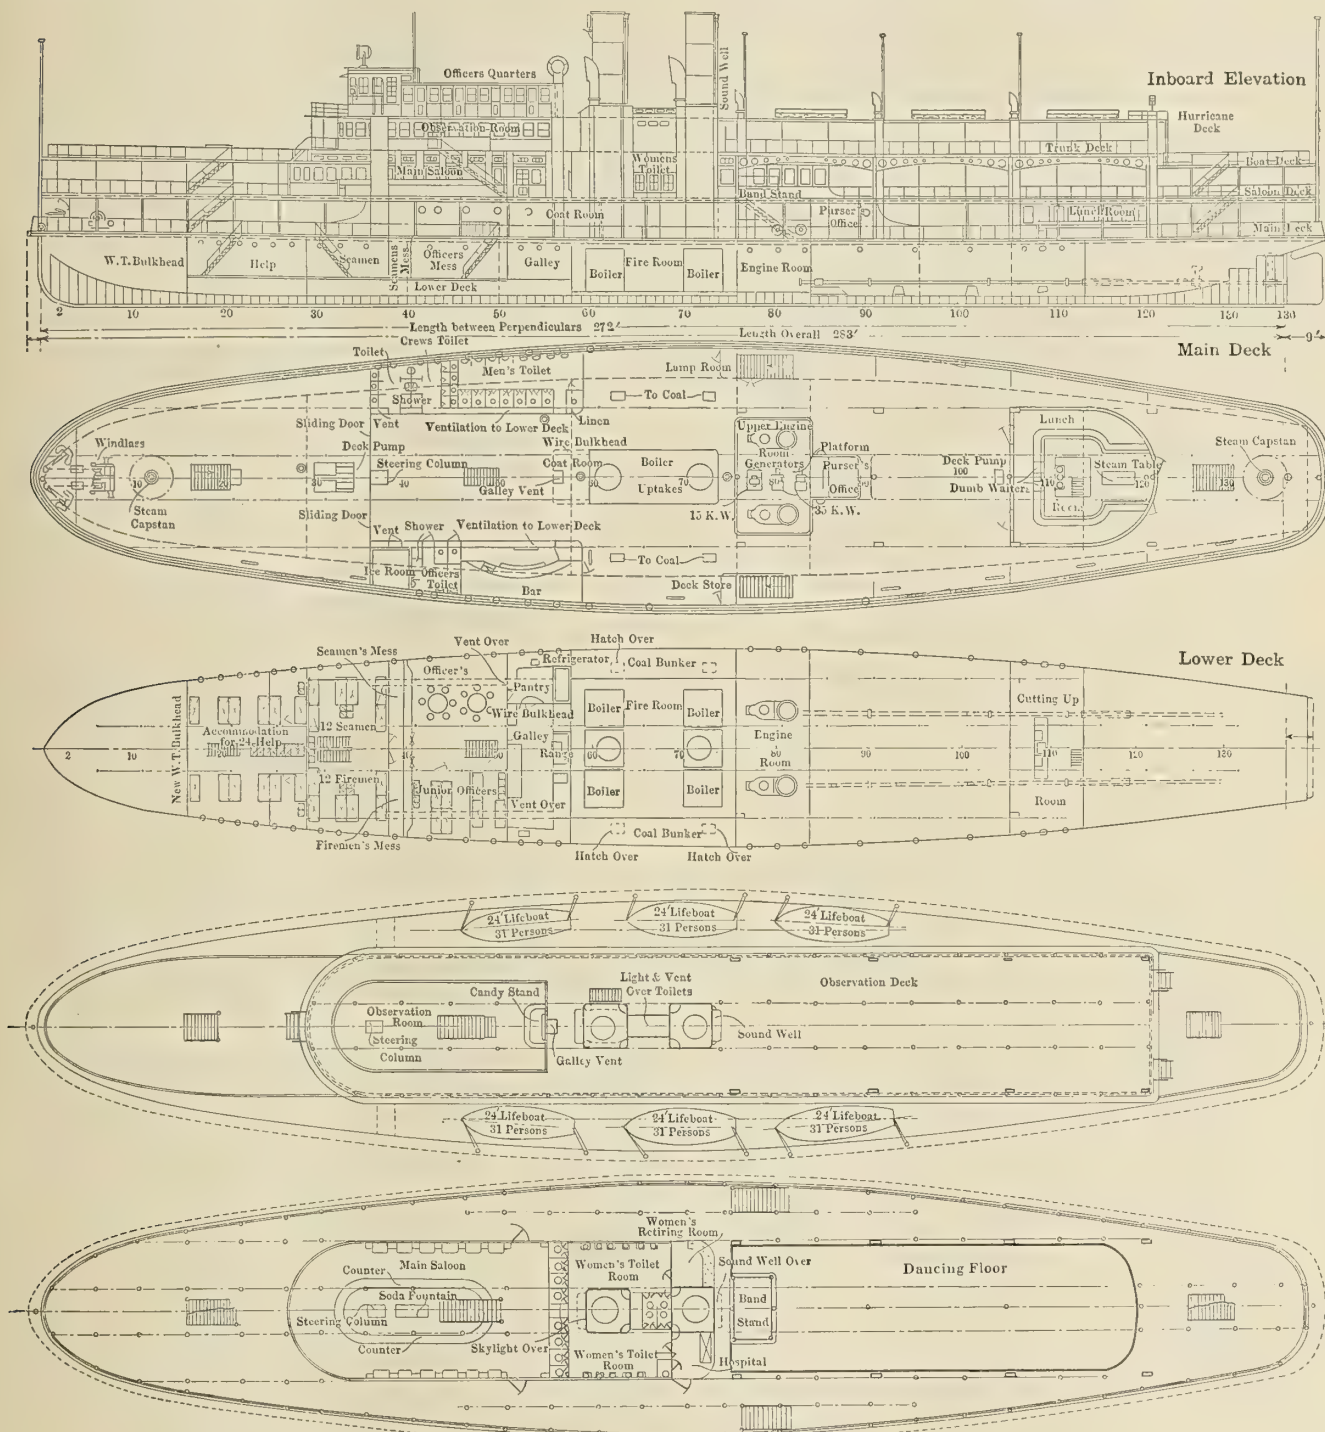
Inboard Profile and Deck Plans of the *Mandalay
